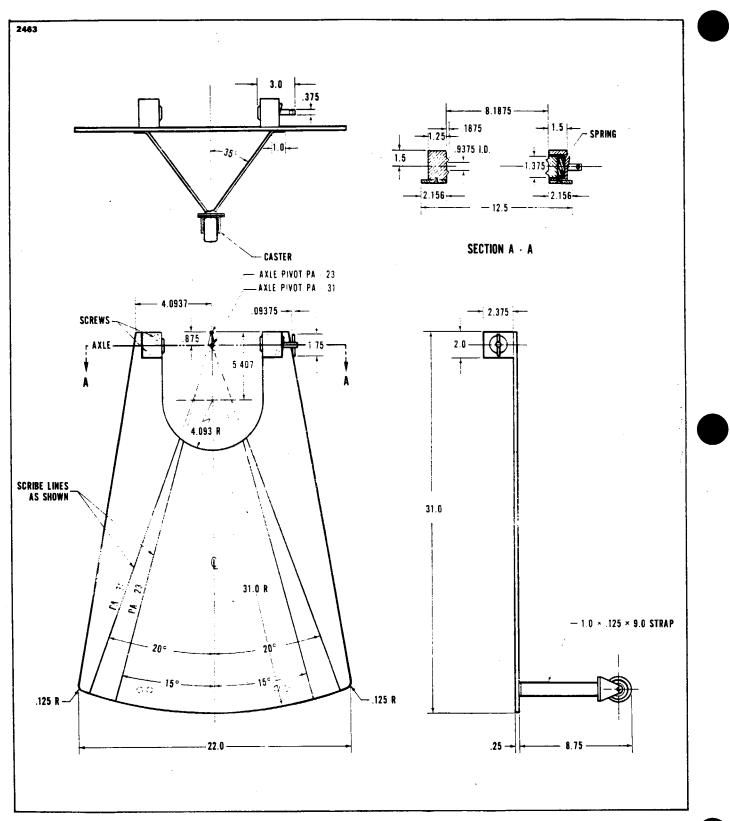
Fabricated Tool, Checking Nose Wheel Alignment
